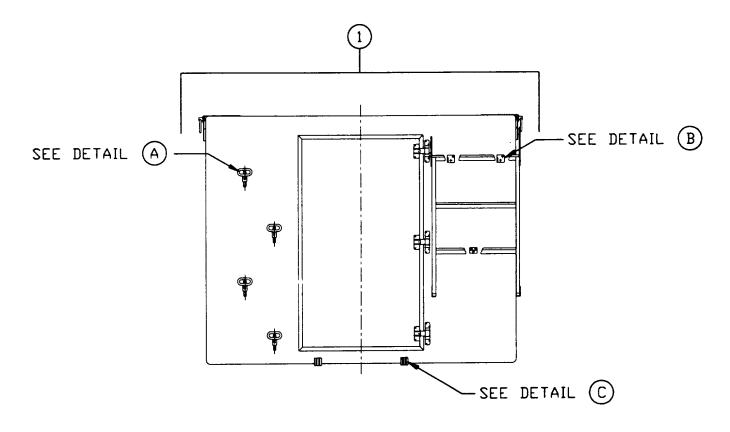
STEP AND LADDER ASSEMBLY (SHEET 1 OF 4)
